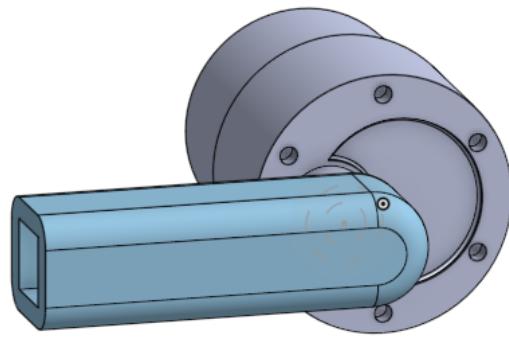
Scraper Bit Holder Attached To GB37-520 Motor (Bottom View)
